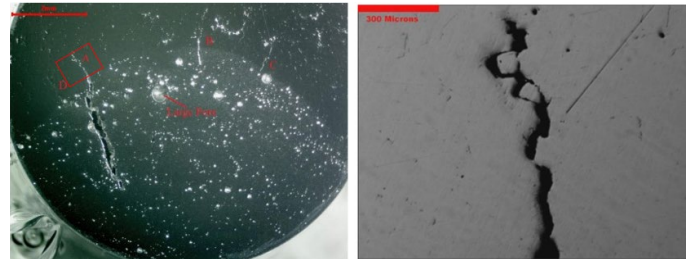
2024-nano showing cracking at the interface and through the weld.
